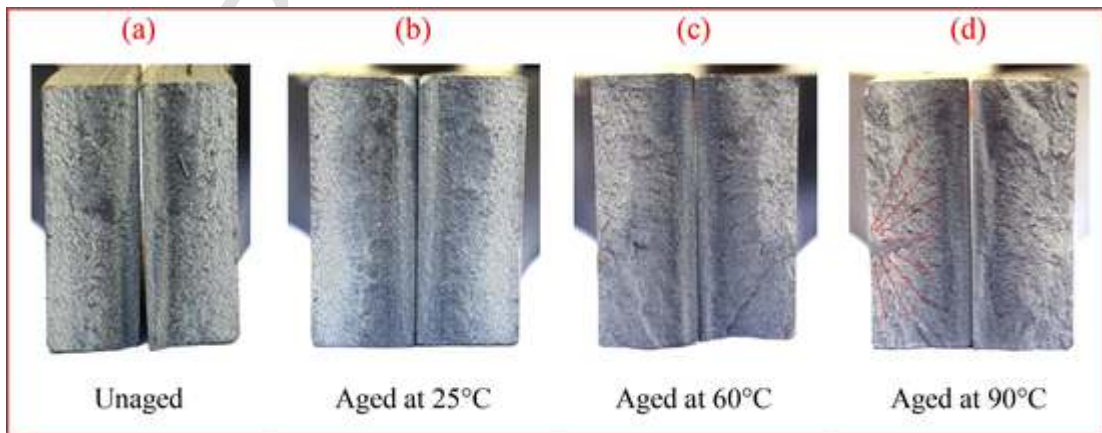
Images of fracture surfaces of unaged and aged C-shaped PVC samples tested under CTPB.
